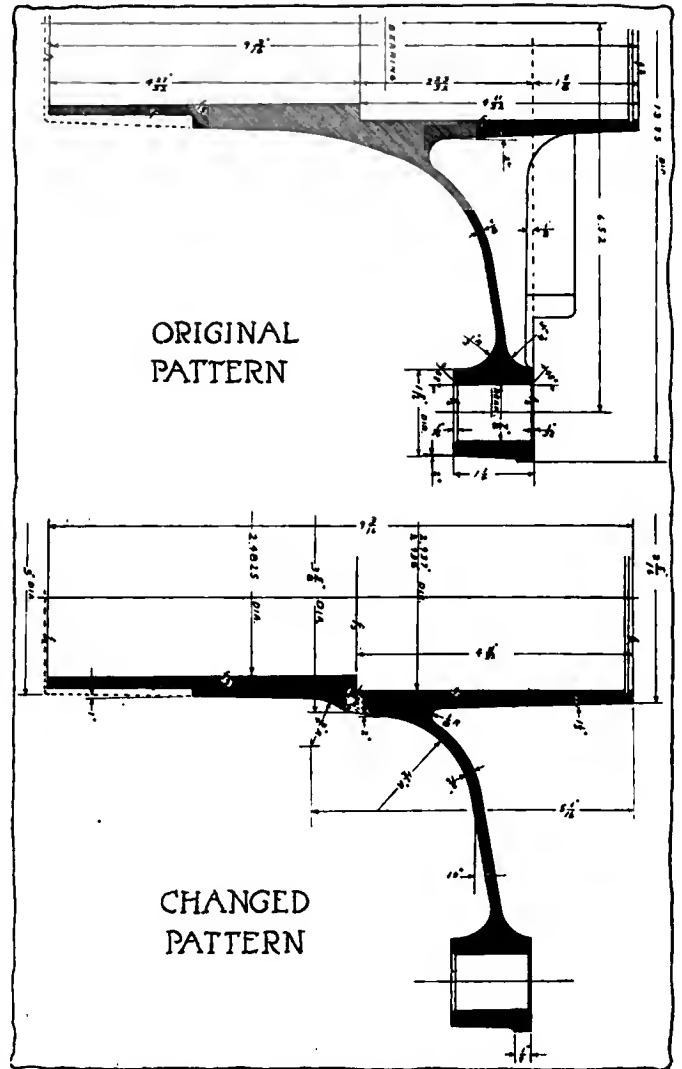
The slight changes made in the pattern transformed the casting from a failure into a success
